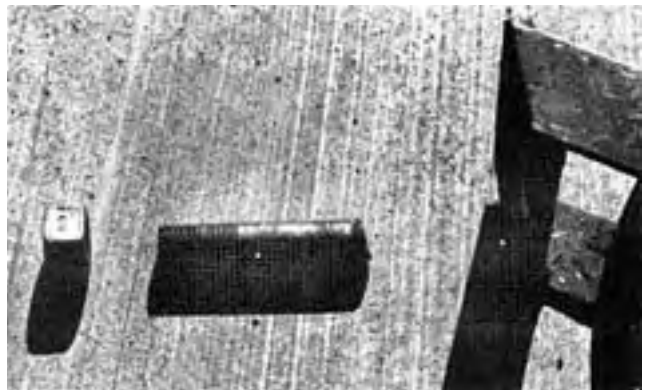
Typical Castor Fork Spindle Failure.
